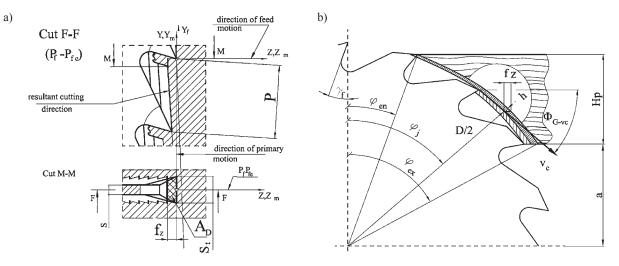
Sawing kinematics (a) on the sash gang saw and band sawing machine, along with kinematics on (b) circular sawing machine, where: f_z – feed per tooth, s – saw blade thickness, A_D – area of the cut, P – pitch, Y, Z and Y_M , Z_M – machine coordinate and setting axes, Y_f – f-set coordinate axis, P_{fe} – working plane, D – circular saw blade diameter, h – uncut chip thickness, H_p – workpiece height (depth of cut), a – position of the workpiece, φ – angular tooth position, Φ_{G-ve} – an angle between grains and the cutting speed direction (Orlowski *et al.*, 2013)
